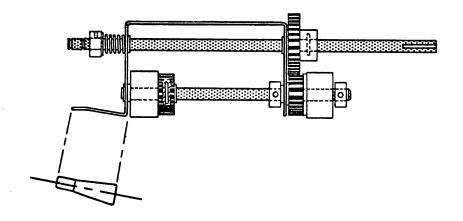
HOPPER & FEEDER ASSEMBLY - LEFT SIDE VIEW
